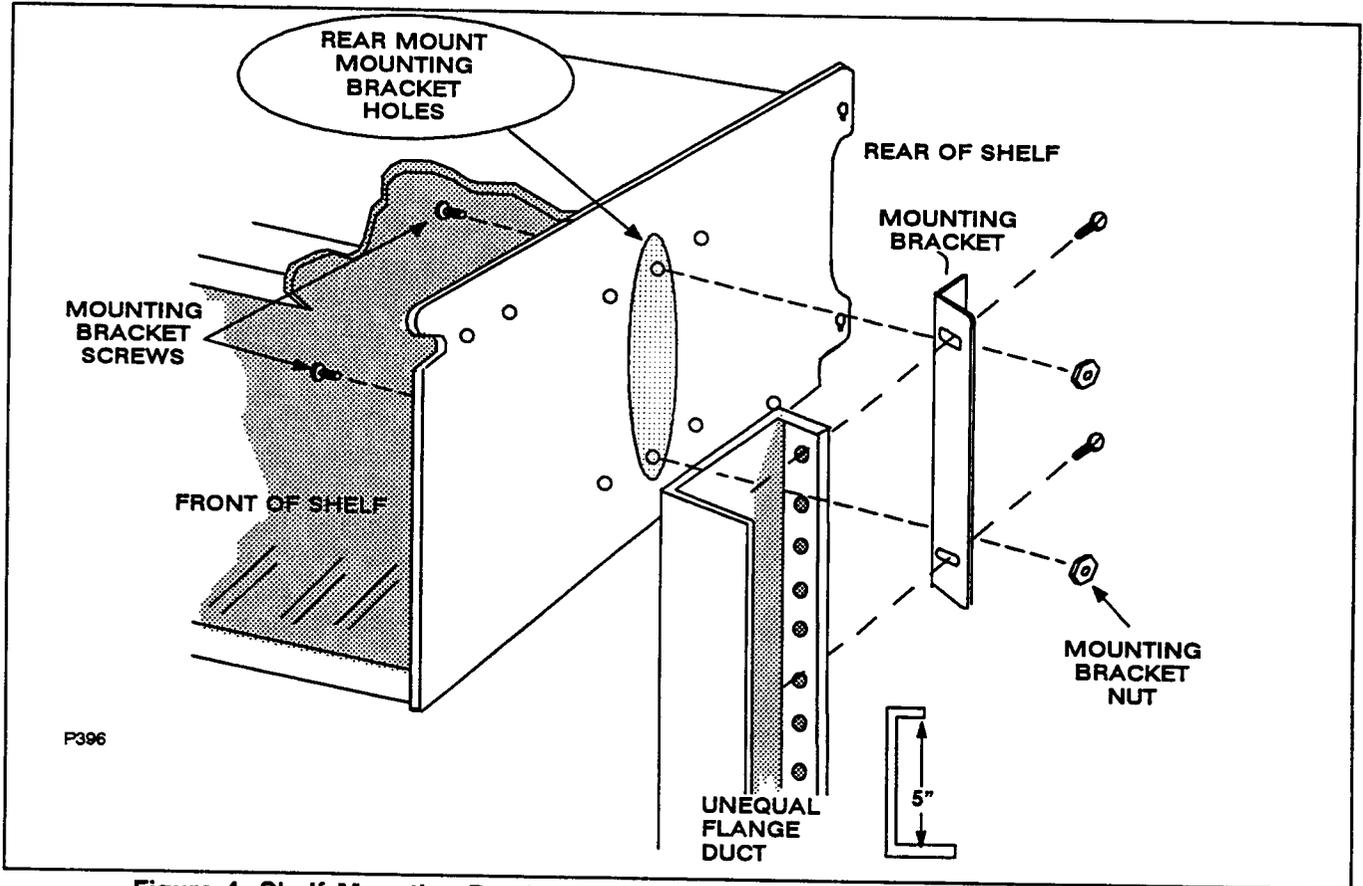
Shelf Mounting Bracket Positions for Uneven Flange Rack, Rear Mount
